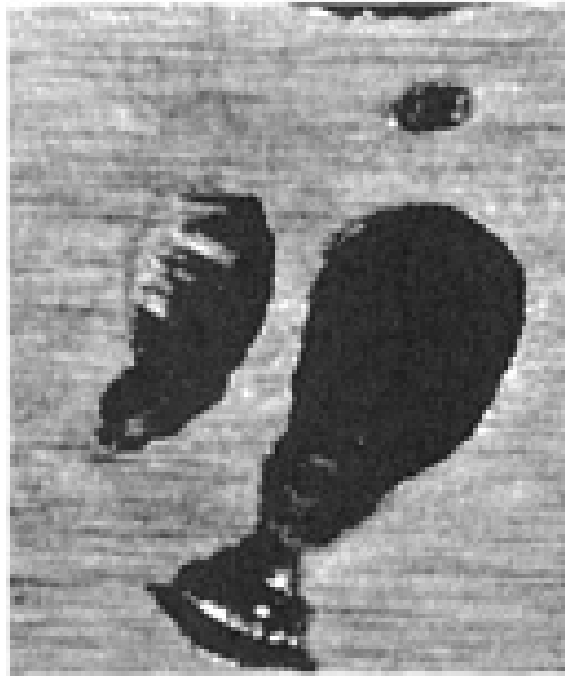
WORMHOLE POROSITY IN A WELD BEAD. LONGITUDINAL CUT. 20×
